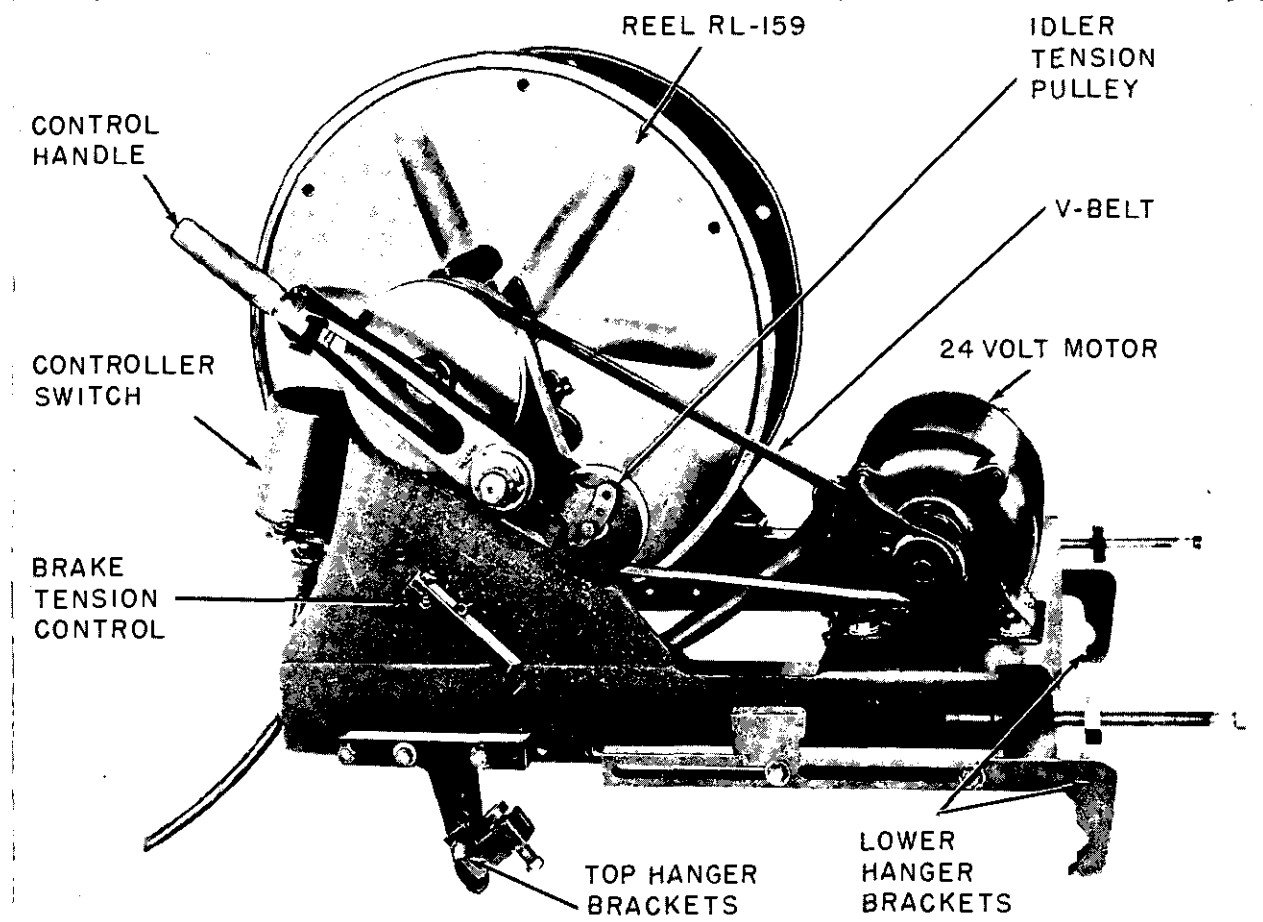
Cable reeling machine, motor-driven RL-172()/G.
